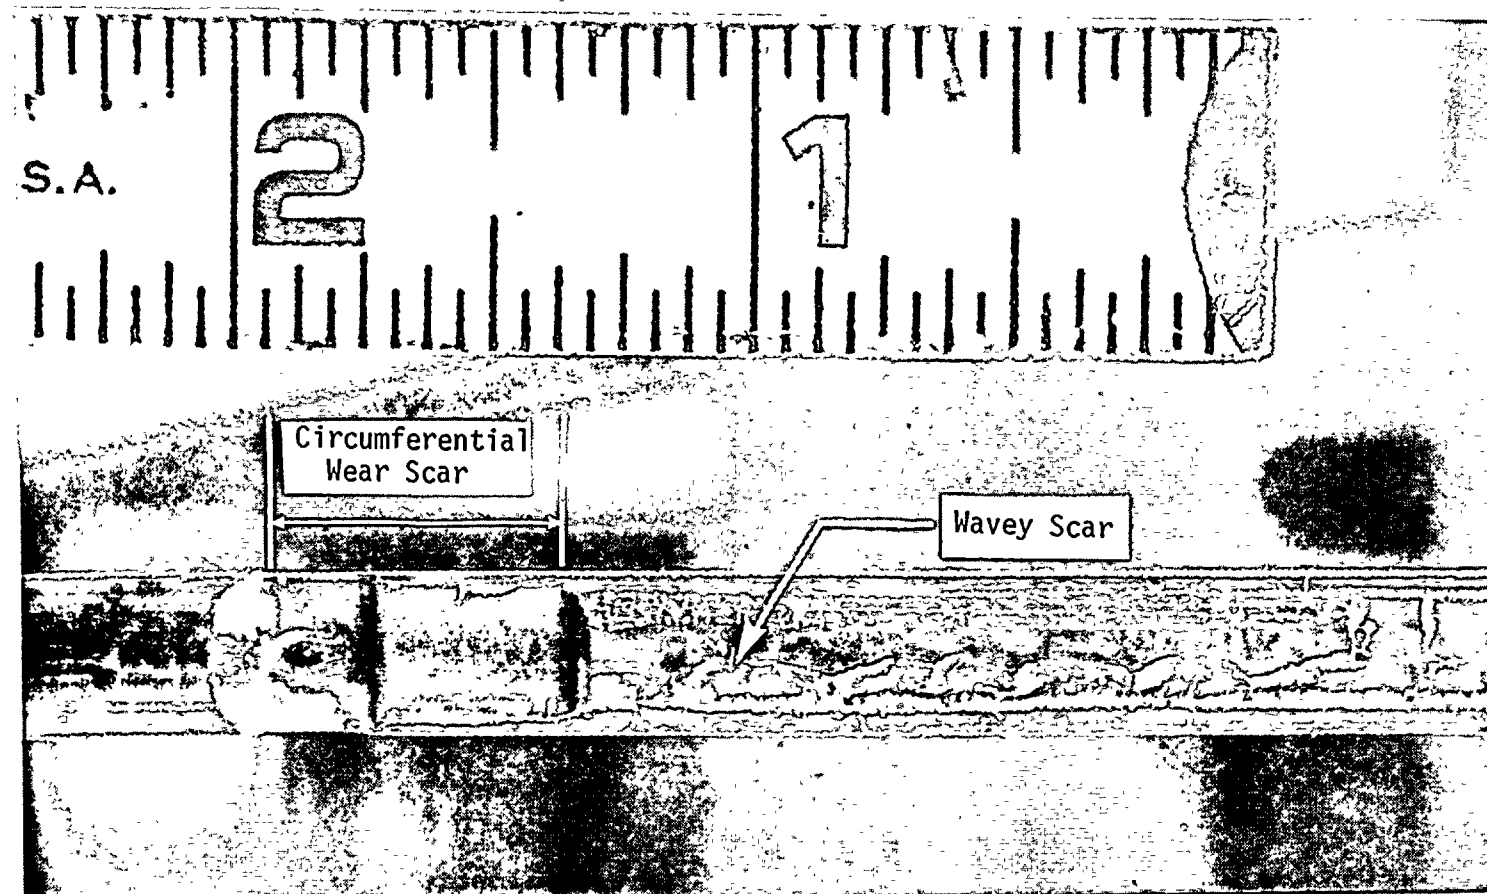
Macro photograph Illustrating the As-Received Condition of the Leaked (Perforated) Thimble Tube "C-7"
